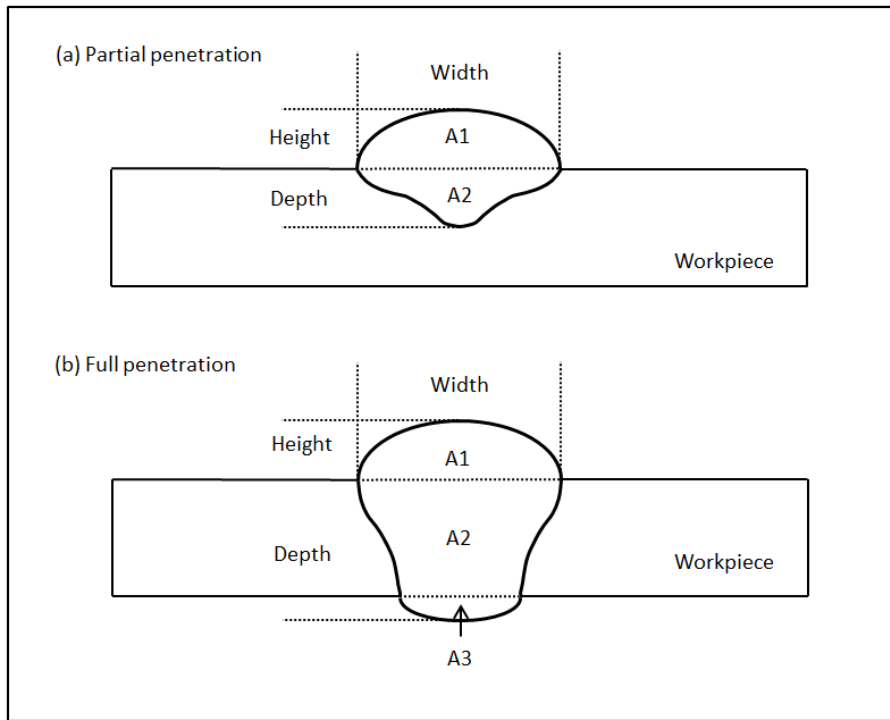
Definition of the geometrical parameters for the weld bead cross-section. (a) Partial penetration; (b) Full penetration.
